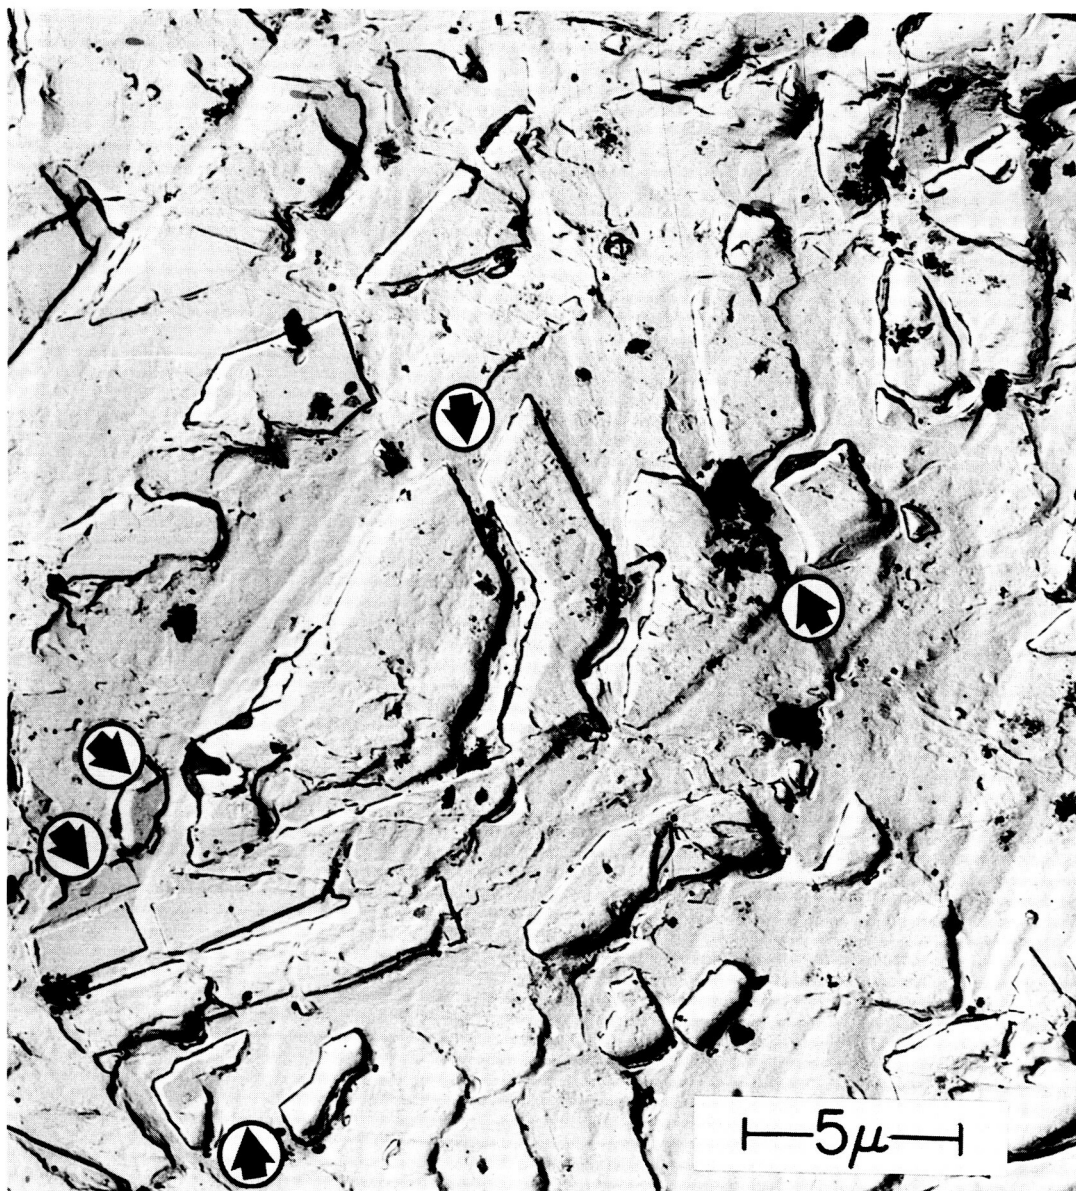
FRACTURE SURFACE OF 2219-T87 WELDED JOINT TENSILE SPECIMEN. Specimen tested with weld crowns intact. Fractograph taken from location within first weld pass (Area 2, Figure 19). Note the extent of elongation of the shear dimples.
